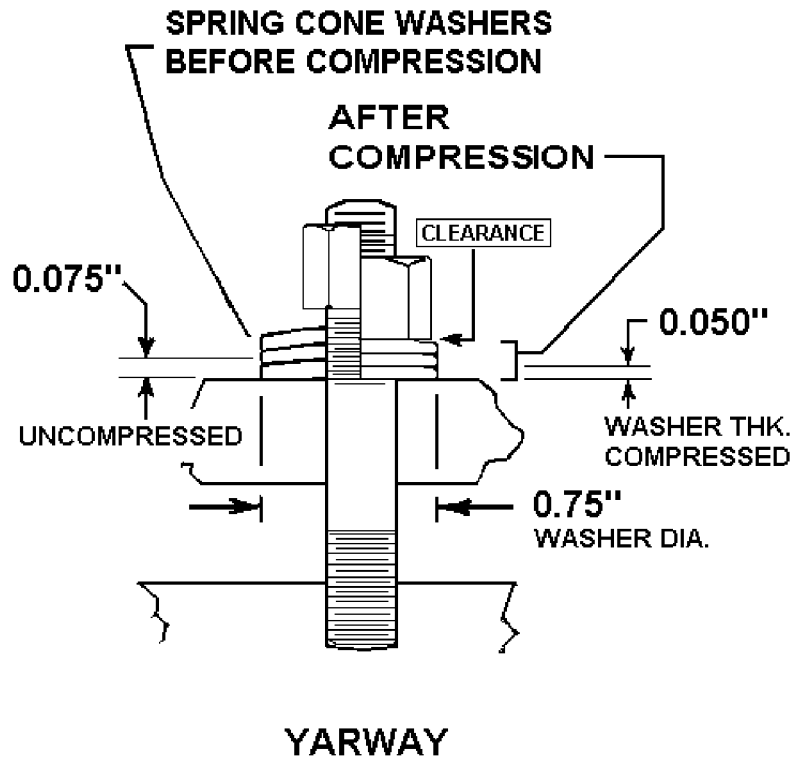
Arrangement of Yarway Spring Cone Washers
